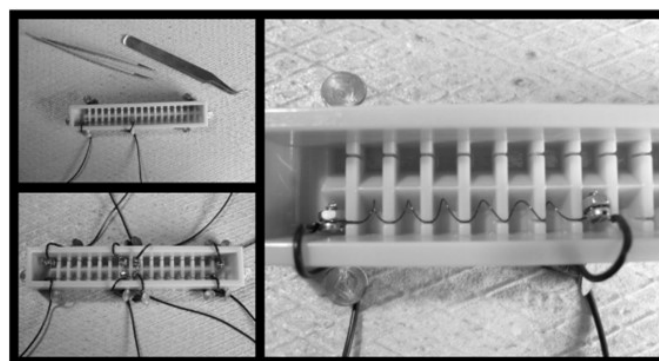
Actuators being set into the mould, before the pouring of the silicone mixture.
